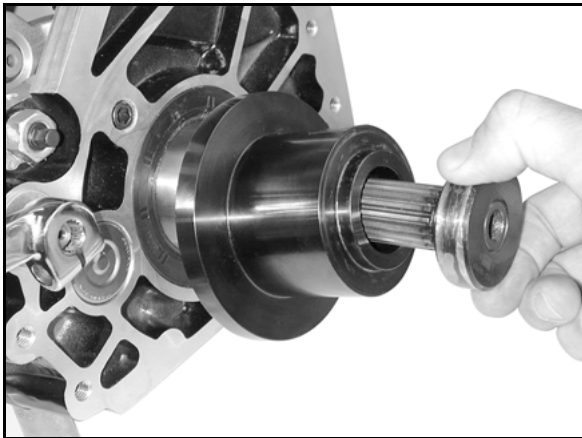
Setting up JIMS® Seal Driver for 5 speeds
